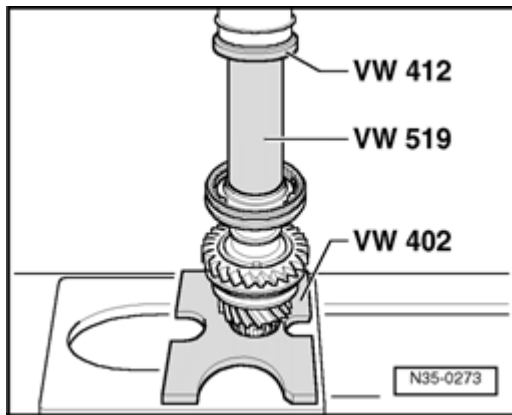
Pressing on 5th gear locking collar/synchromesh hub together with spacer sleeve
